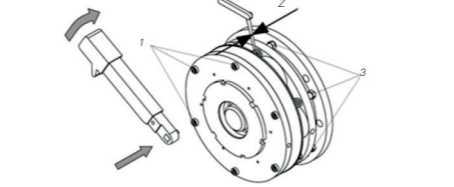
Checking the air gap of the brake sizes 25 and 31
